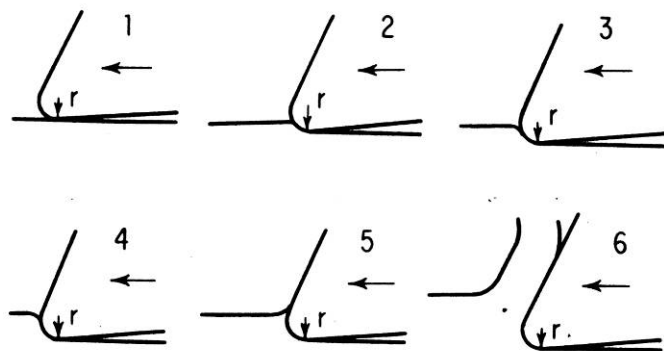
Chip formation in relation to tool cutting edge radius⁷⁵
